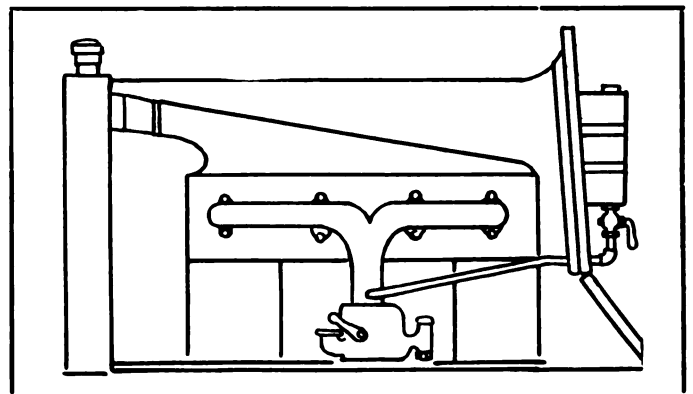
Engine Priming System Designed to Supply Fuel to the Intake Manifold Above the Carburetor.
